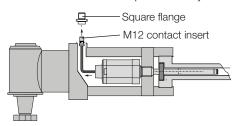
Plug-in system based on the example installing the transducer in a hydraulic cylinder
